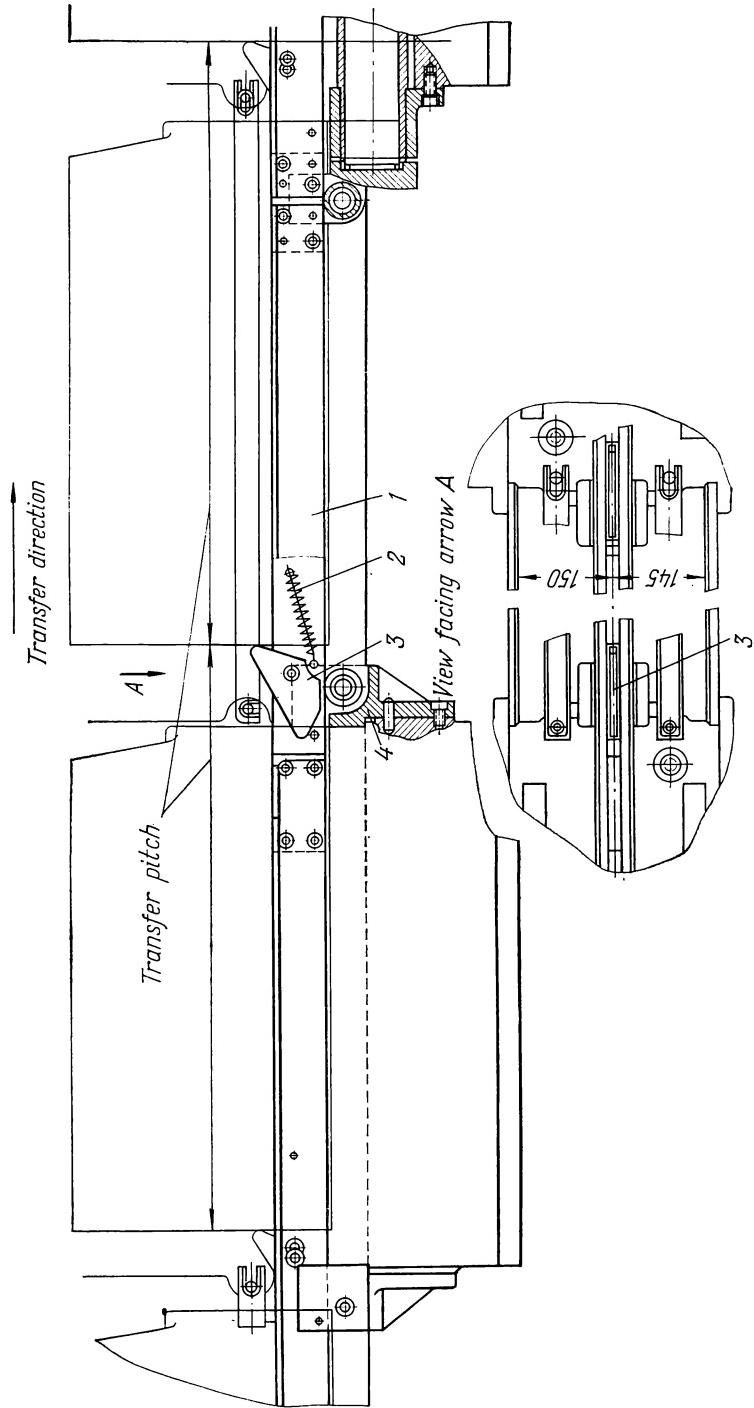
Transfer bar with spring-loaded disappearing fingers
